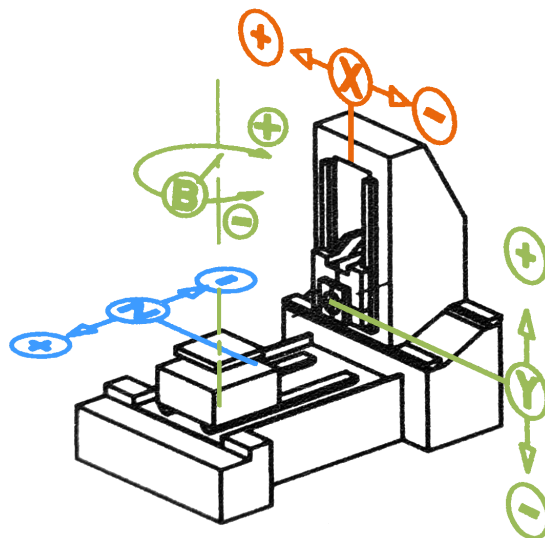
TAJMAC-ZPS H630 horizontal machining centre structure (after the diagram on the machine)
